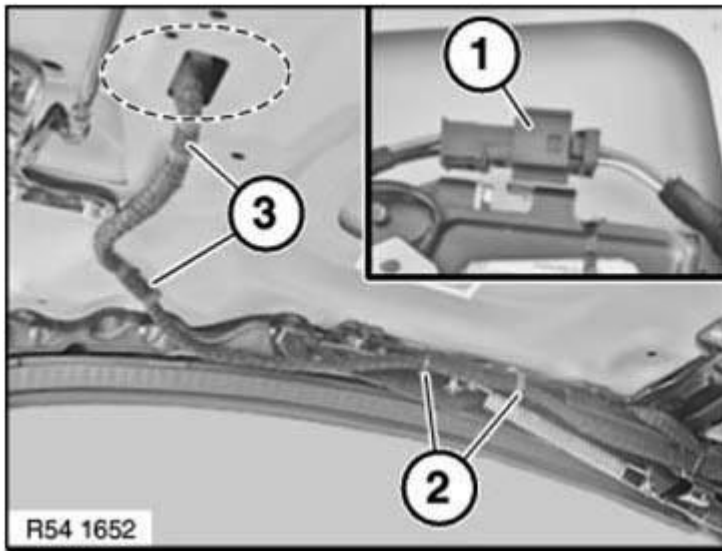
Identifying Plug Connection, Cable Tie And Cable Holder
